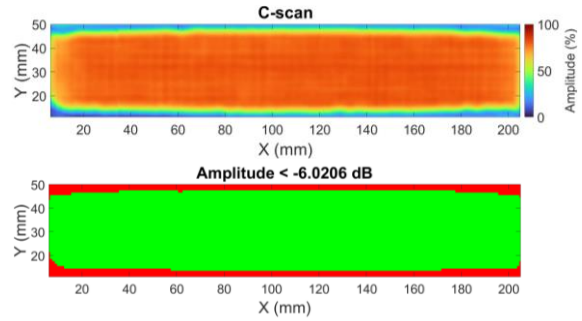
WCUT of a resistance welded coupon in the dimensions of (200.0 x 40.0) mm² with non-optimized tooling configuration
